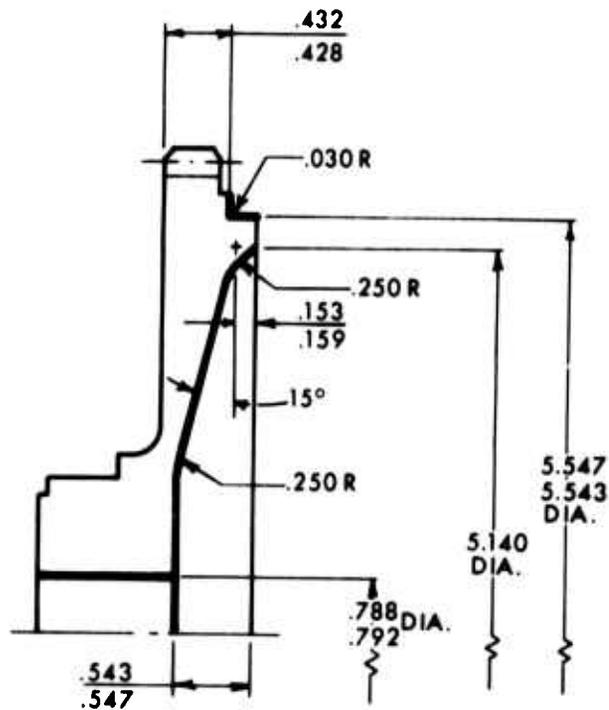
RG351-11182-106, Machine Operation Drawing. (Sheet 1 of 4).
